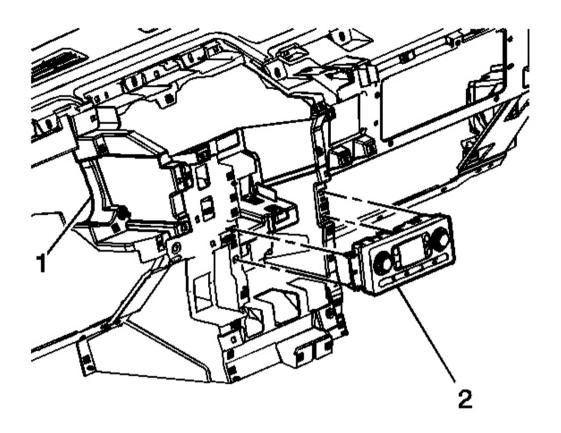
HVAC Control Module & I/P Panel Courtesy of GENERAL MOTORS CORP.
